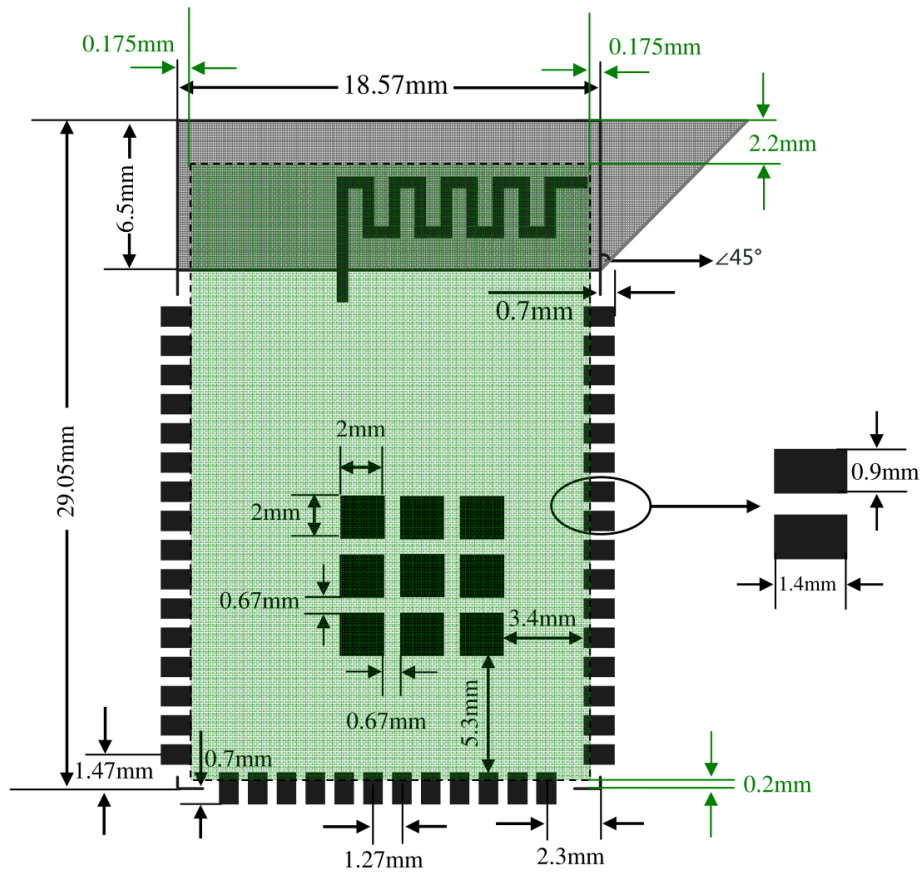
Recommended PCB Layout of TA3200R1D module shows the Mechanical of TA3200R1D module.
